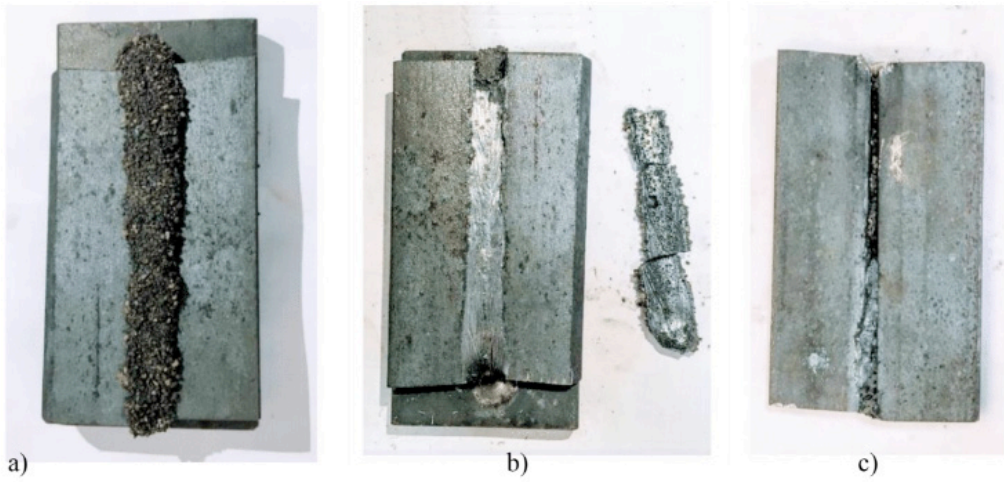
Welding on the 200 A plate - a) With slag b) no scum c) background of the piece
